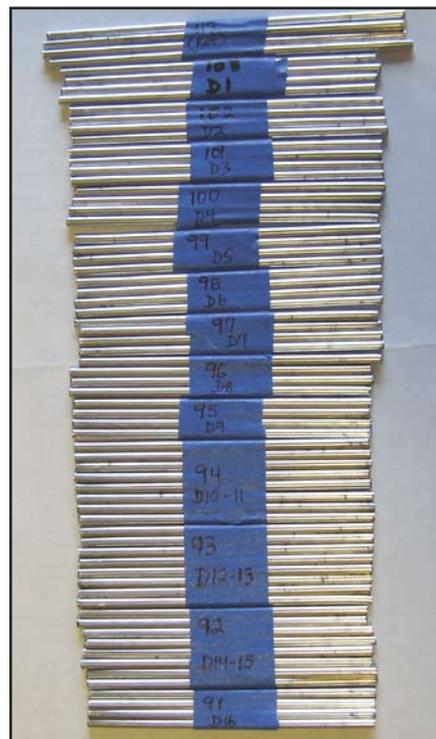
Lineup of welding rod elements for four 23 cm Yagis, ready to be installed on booms.
